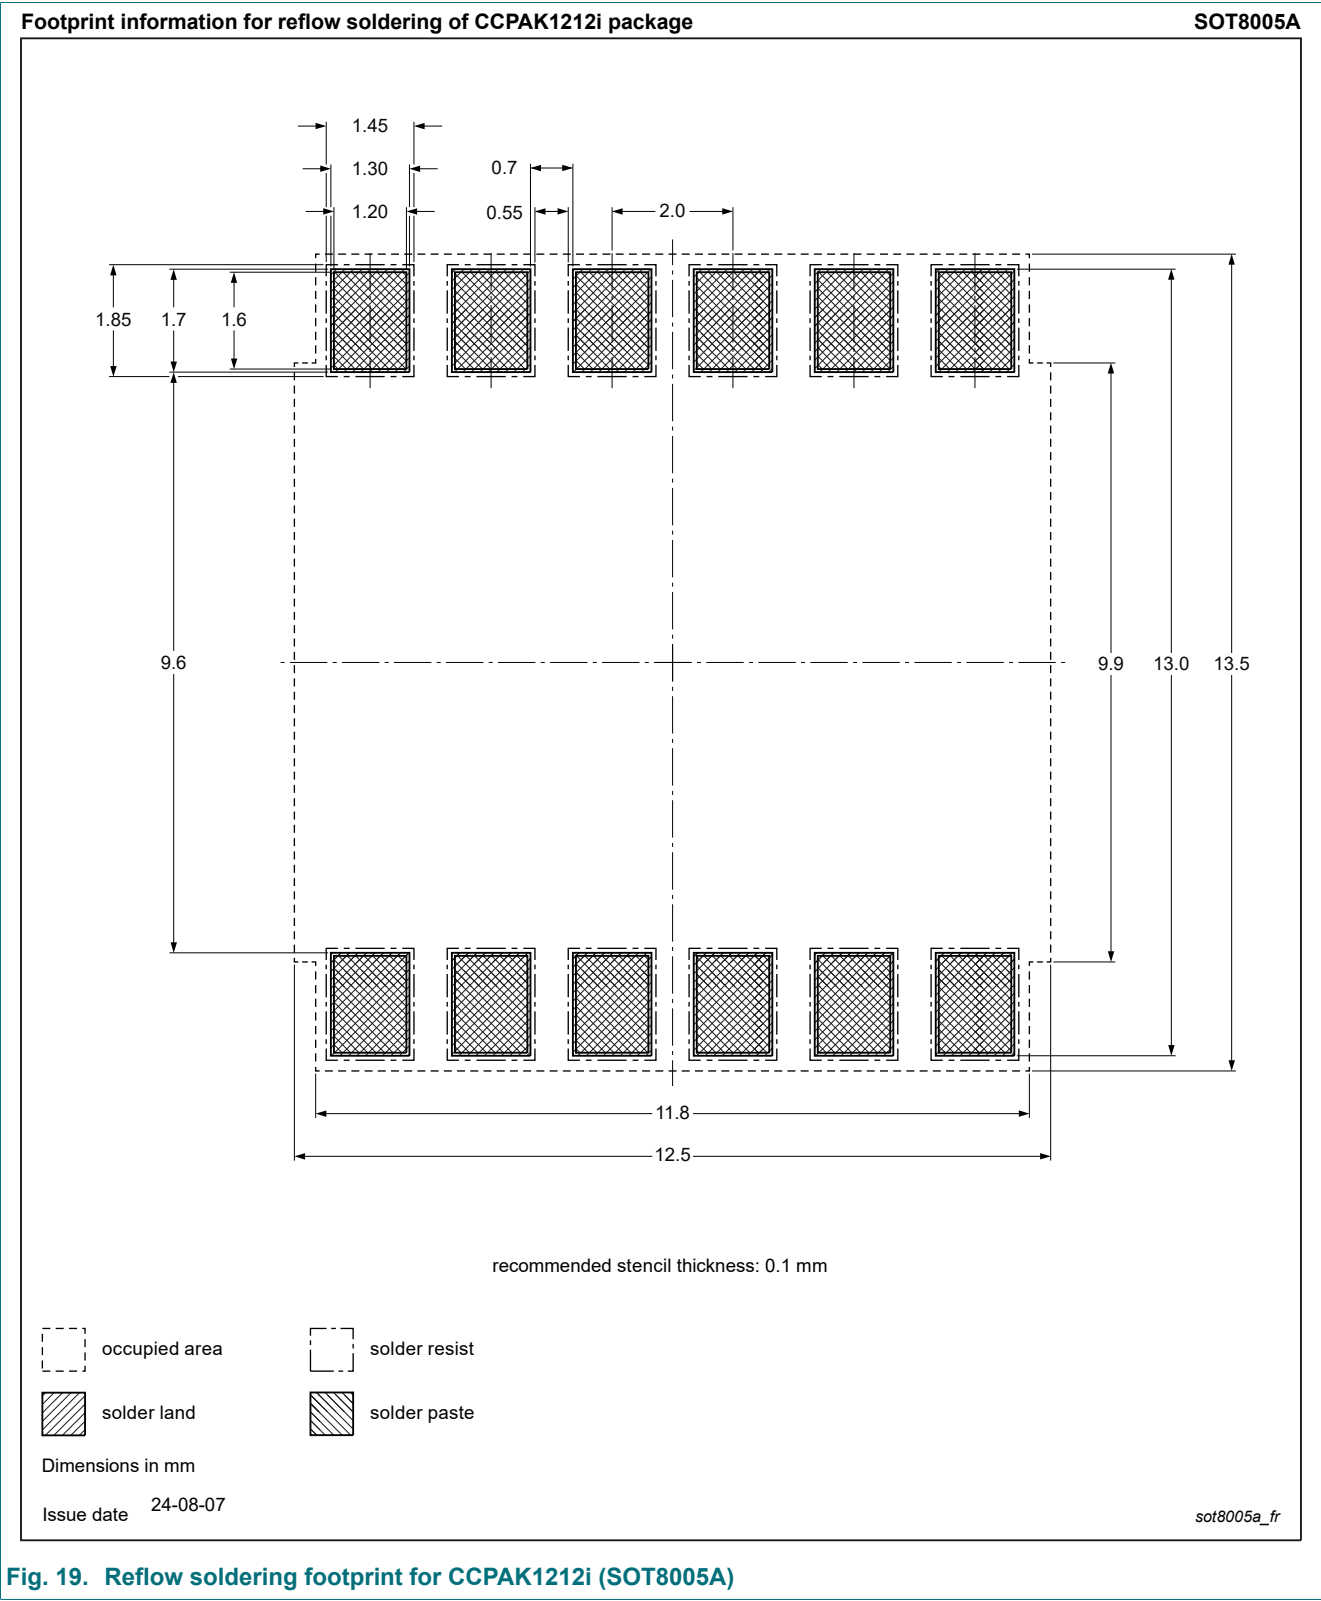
Reflow soldering footprint for CCPAK1212i (SOT8005A)
